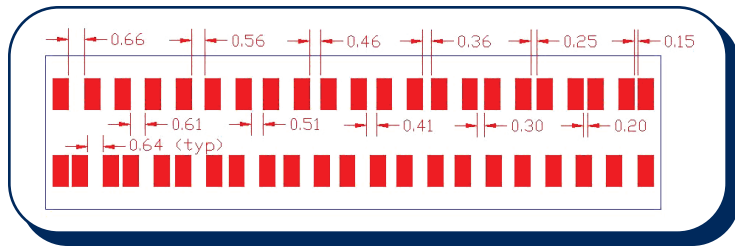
Wetting Test Pattern (dimensions in mm)
